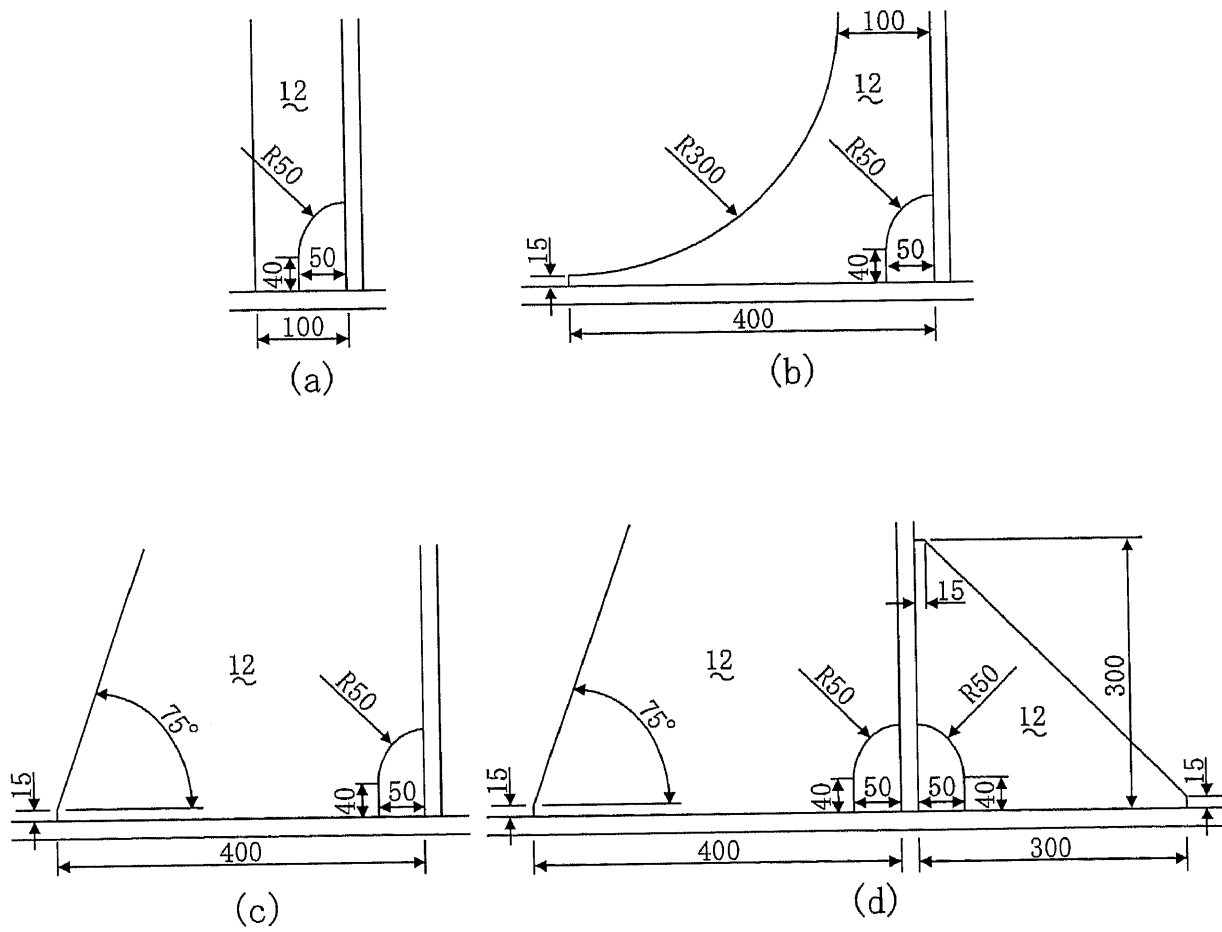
Structural details of web-stiffeners; (a) flat bar stiffener, (b) web-stiffener with rounded end, (c) large bracket, (d) large bracket with a back bracket.
